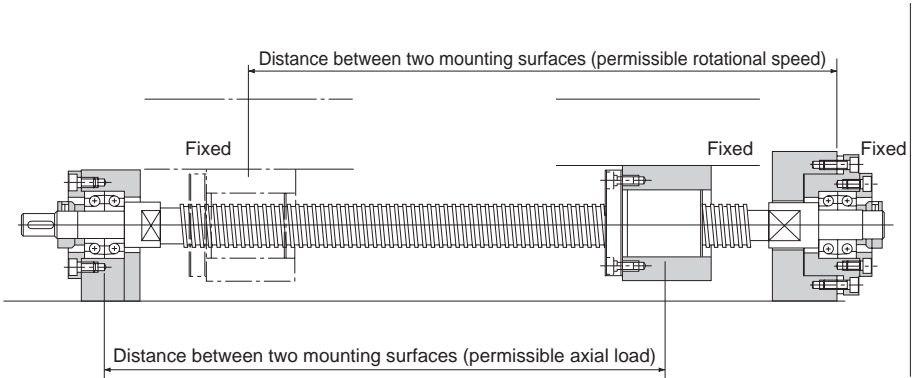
Screw Shaft Mounting Method: Fixed - Fixed
